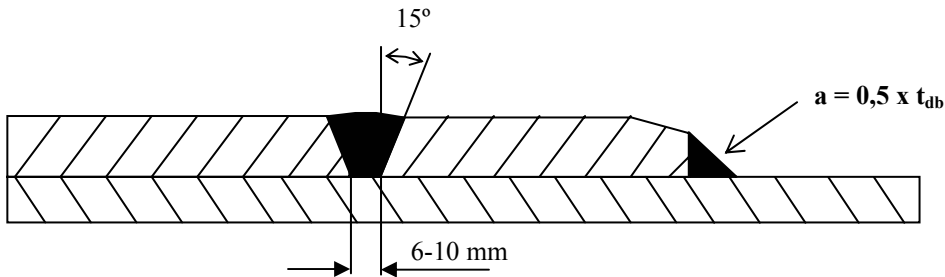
Section B-B: Welding of doublers to the shell
